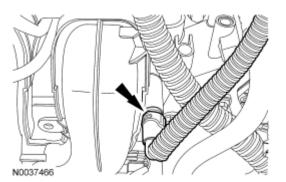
Locating Evaporative Emissions (EVAP) Tube From Intake Manifold Courtesy of FORD MOTOR CO.
